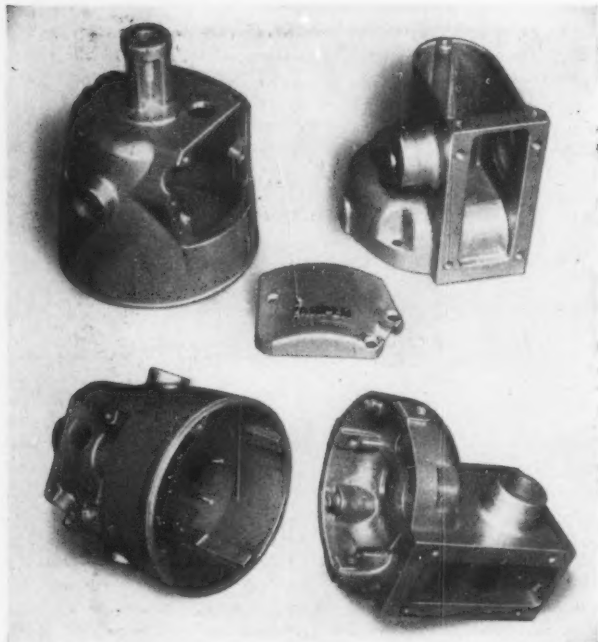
Views of the Three Castings Employed in the Tarpen Hedge Trimmer, which Include a Motor Housing and a Worm Drive Gear Box. The Castings are made in L.M.6 Alloy on Reed-Prentice 1½ G Machines
